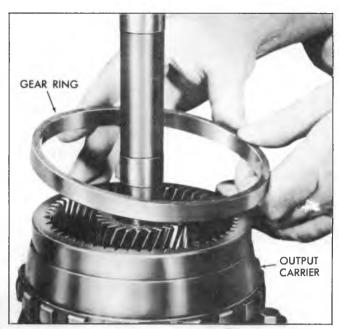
T-Installing Front Internal Gear Ring to Output Carrier
